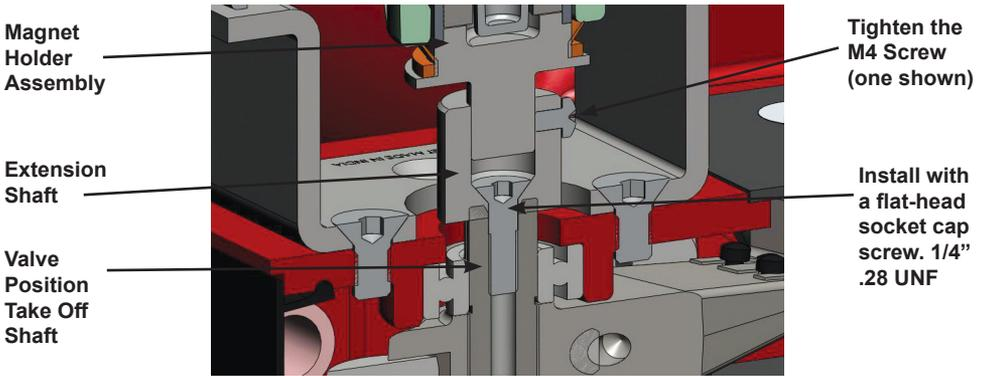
Extension Shaft to the Valve Position Take-off Shaft
